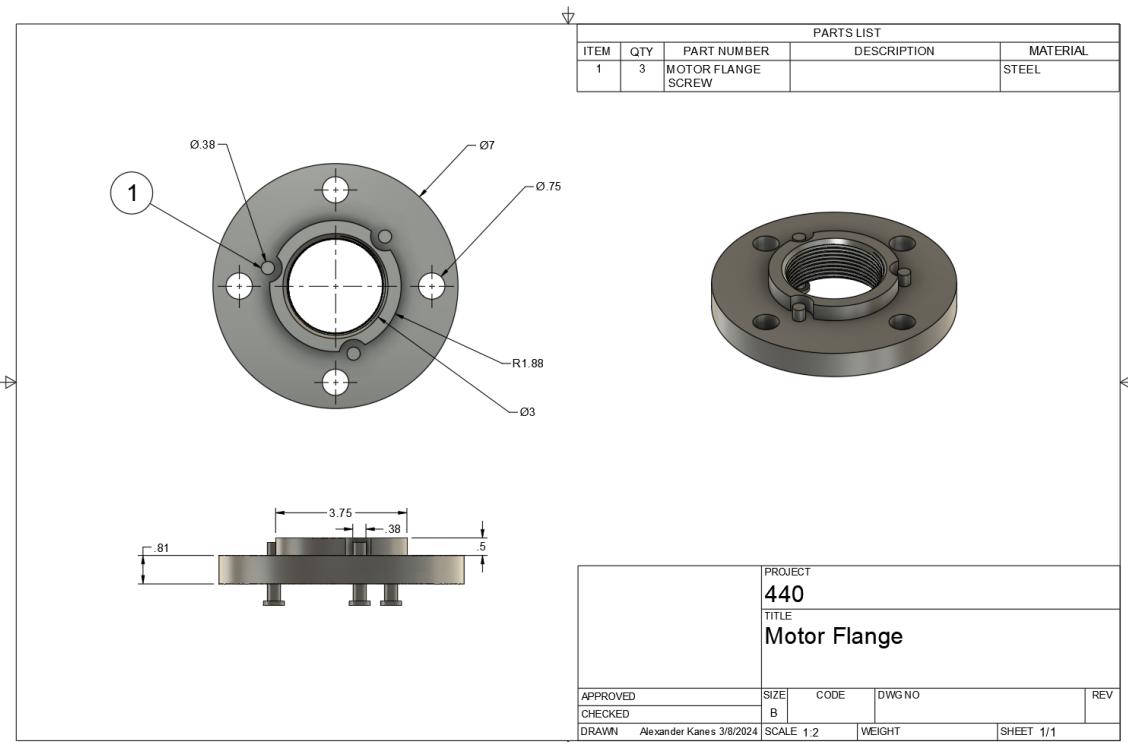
2D Drawing of Motor Flange with Mounting Hardware.
